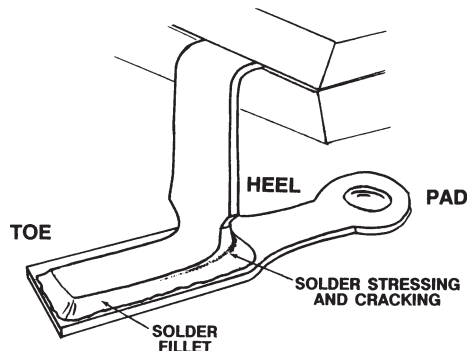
Typical heel to toe crack propagation for gull-wing solder joints
